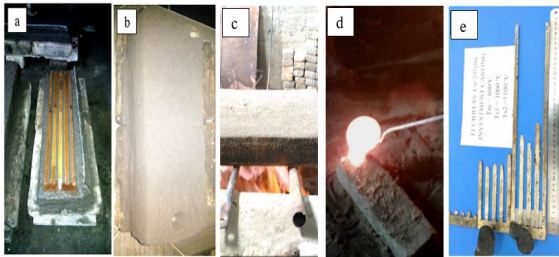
The investment casting method (a) wax pattern (b) the wax pattern is coated with clay (c) dewaxing the wax pattern (d) pouring the mold (e) fluidity specimen
